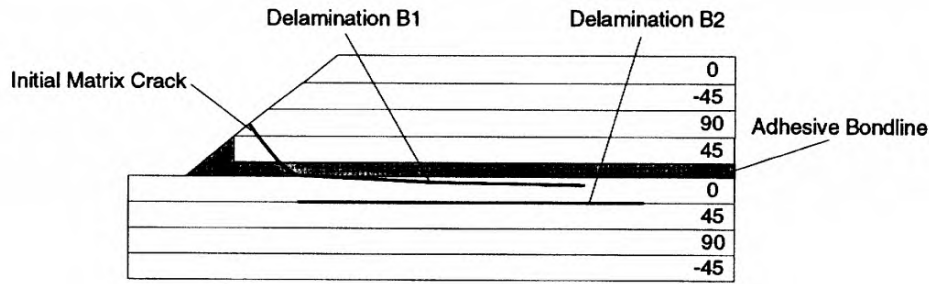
Skin-stringer bondline specimen: Typical damage patterns in corners 2 and 3 [44]
